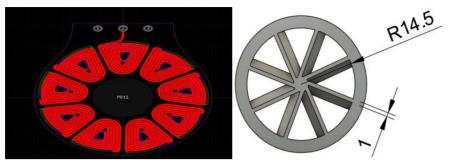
(a) PCB Stator (b) Dimensions of rotor
